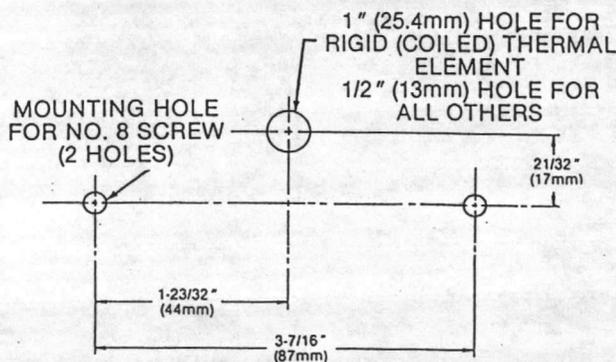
SURFACE MOUNTING HOLE DIMENSIONS
